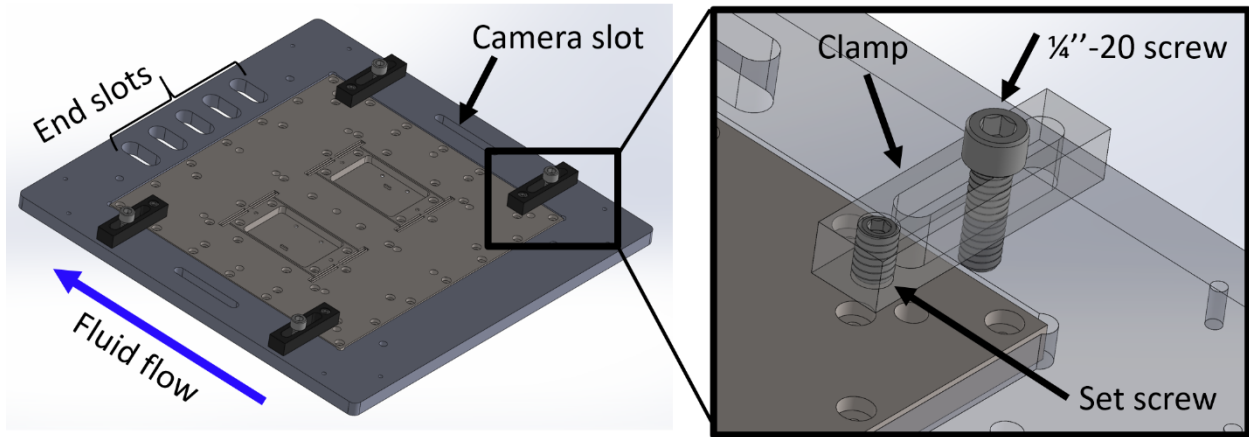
CAD model of new sensor system set up with modified sensor plate attachment configuration onto the holder plate.
